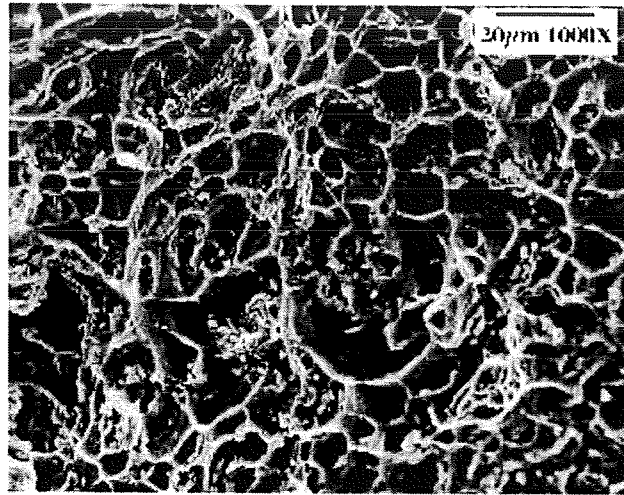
Microstructure of the Fracture Surface of Al 4043 Weld
